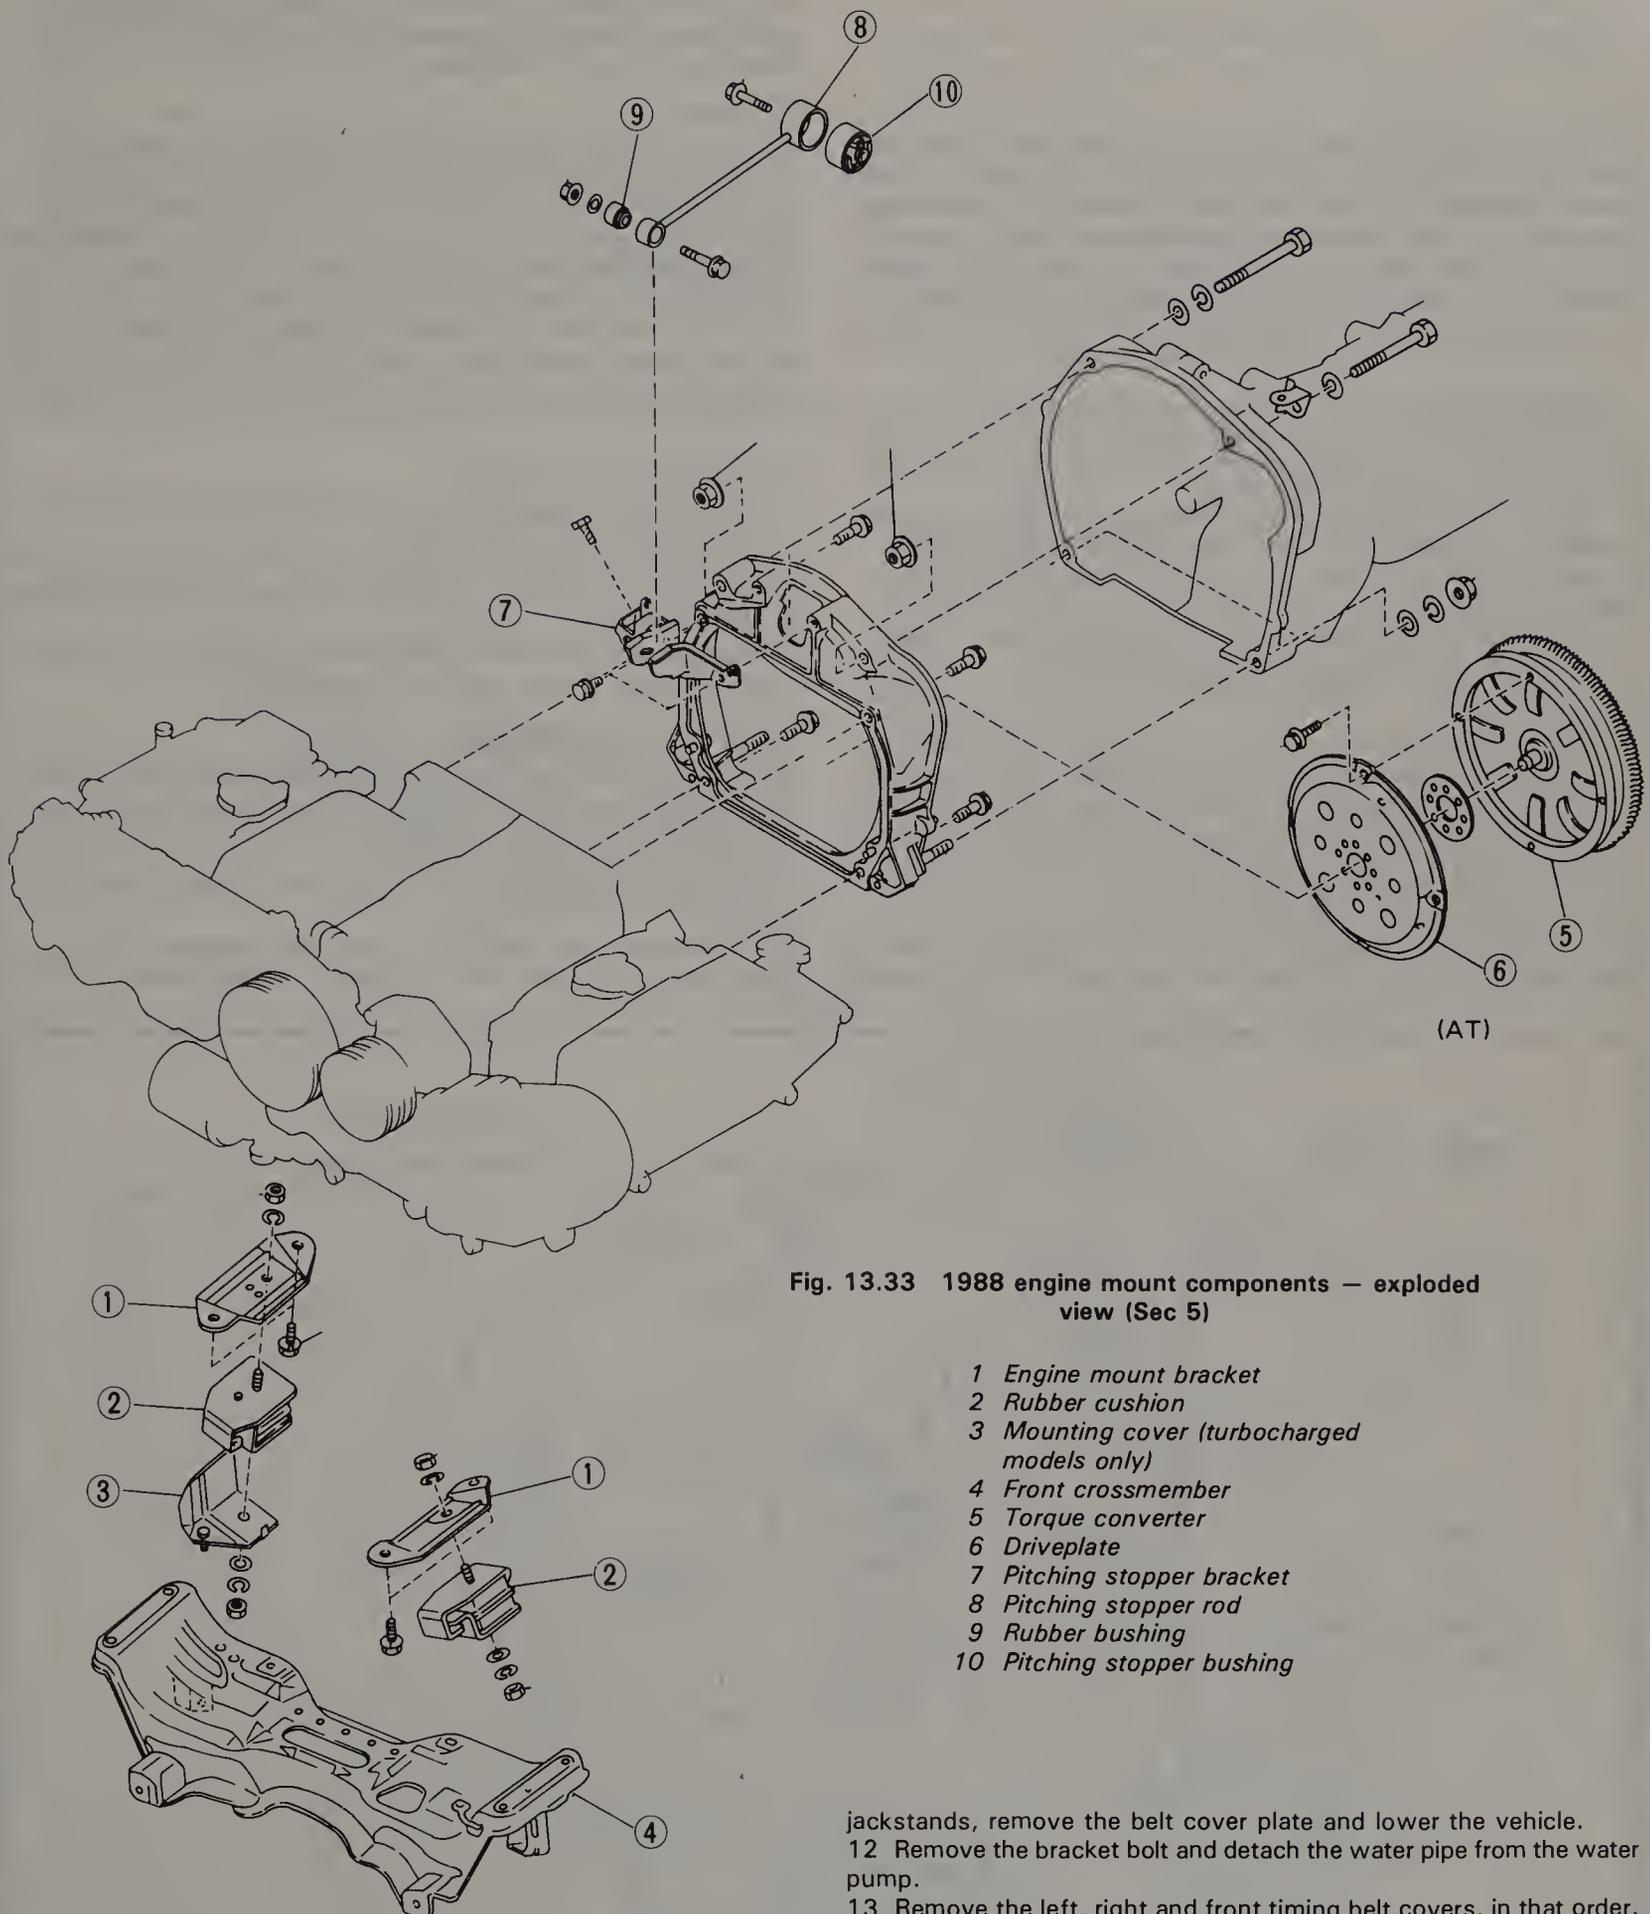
1988 engine mount components — exploded view (Sec 5)
